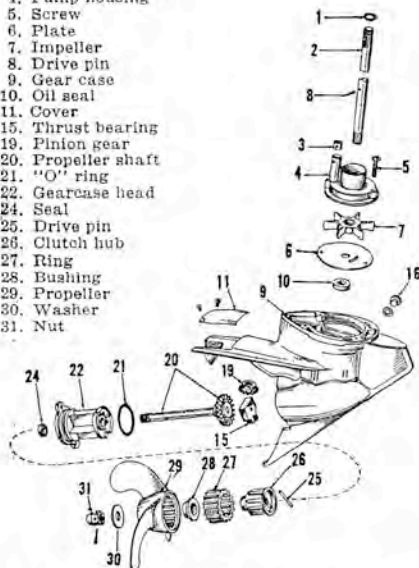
Exploded view of lower unit gear case, propeller and water pump assembly used on Lightwin motors. "O" ring (1) seals upper drive shaft splines.
